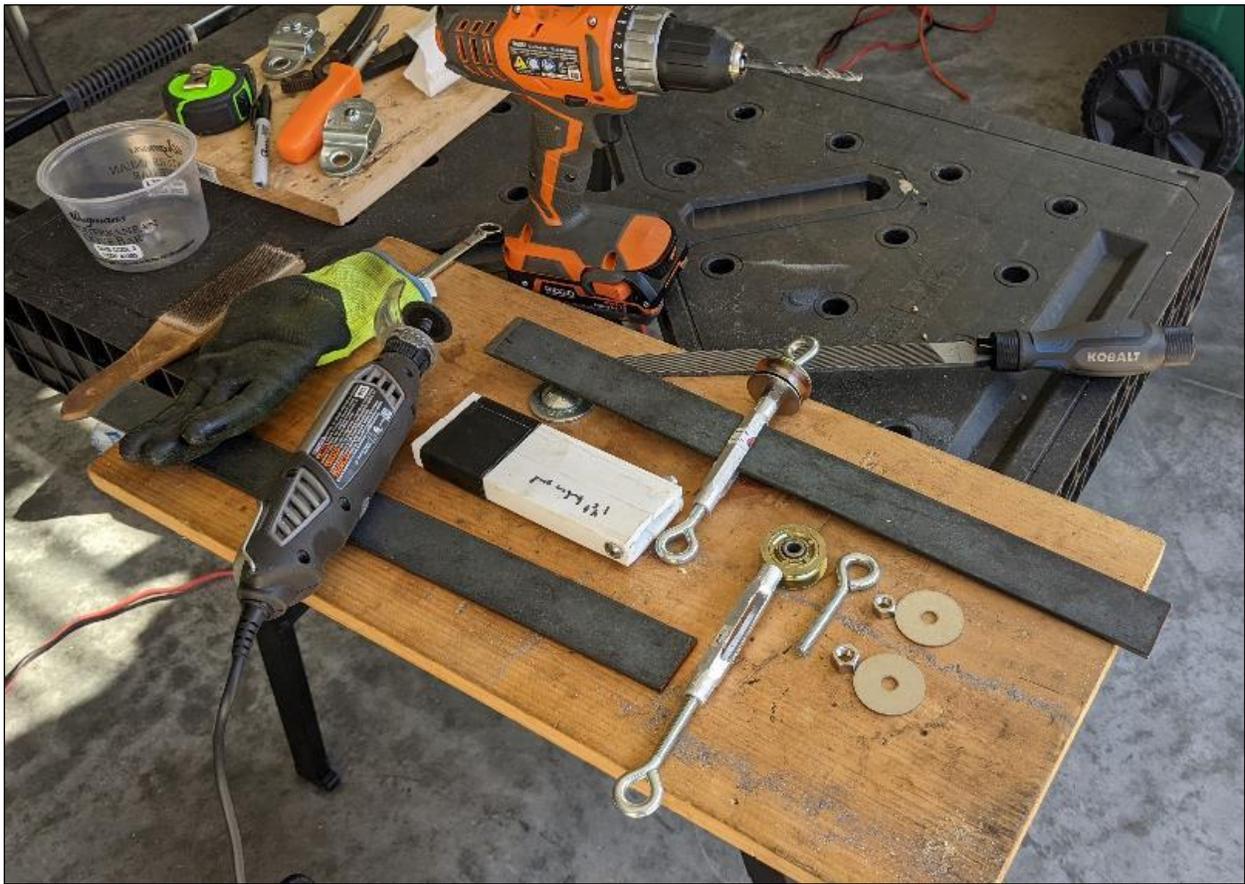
Step three, drill, cut and file slots in the turnbuckles for the steel bar stock and assemble the pulley wheels using nuts to lock the right-threaded turnbuckle bolt in place so that the wheel spins freely. The left-threaded turnbuckle bolt is loosened to move the wheel along the steel bar and then tightened to hold the wheel in the desired position. The plastic guard for the bar stock point is fabricated from saw guard plastic channel material.
